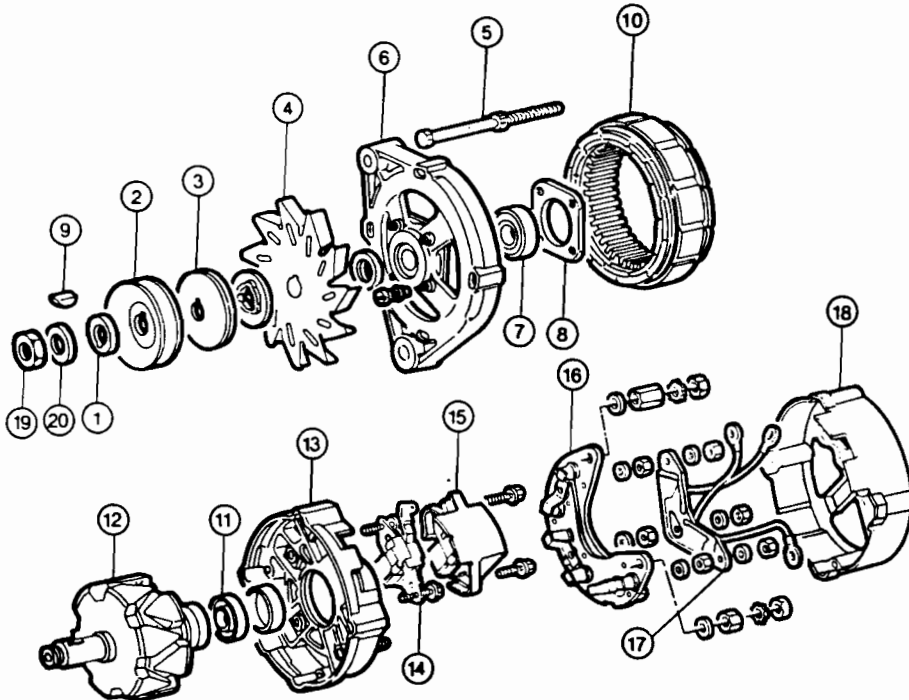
Exploded view of Paris-Rhone alternator (Sec 9)
